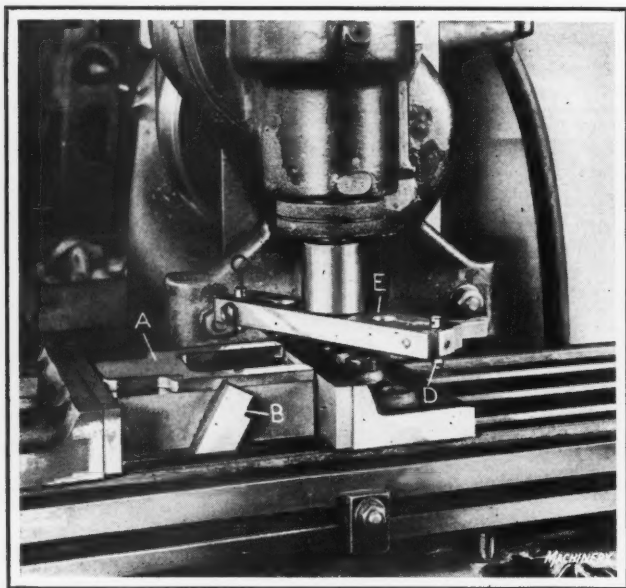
Finishing Both Sides of a Part of Irregular Outline on a Milling Machine
